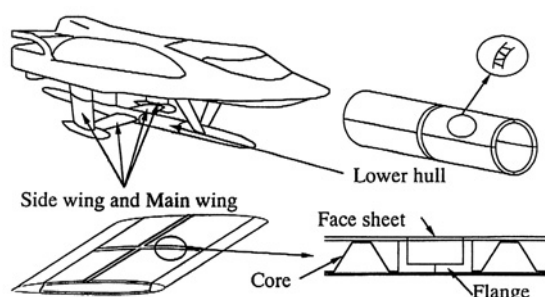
Composition of honeycomb panel used for main parts of Techno-Super-Liner
